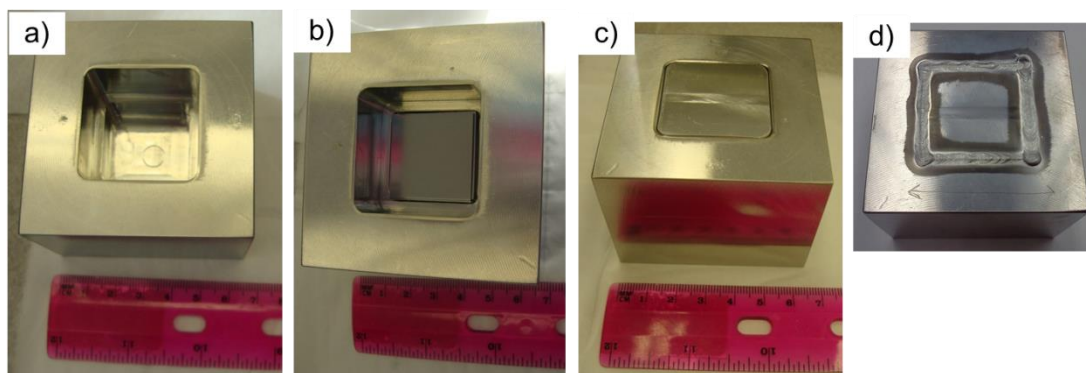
a) The stainless steel box for holding the foils during rolling is shown before assembly. b) The tungsten and grade 92 steel foils have been layered within the stainless steel box. c) The lid of the stainless steel rolling box fits flush with the top. d) The lid has been e-beam welded closed, and the arrow on the top surface indicates the rolling direction.
